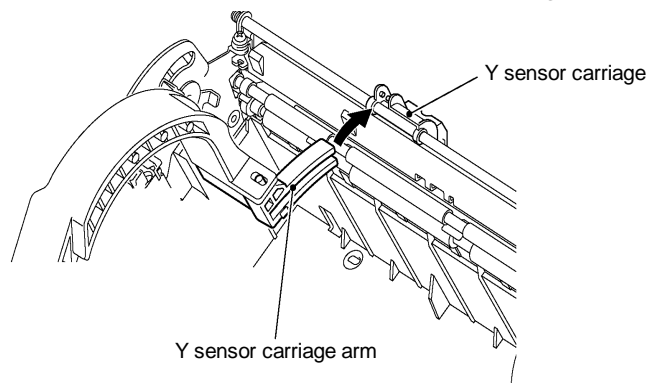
Installing the Y-CA Chassis Assy 1
